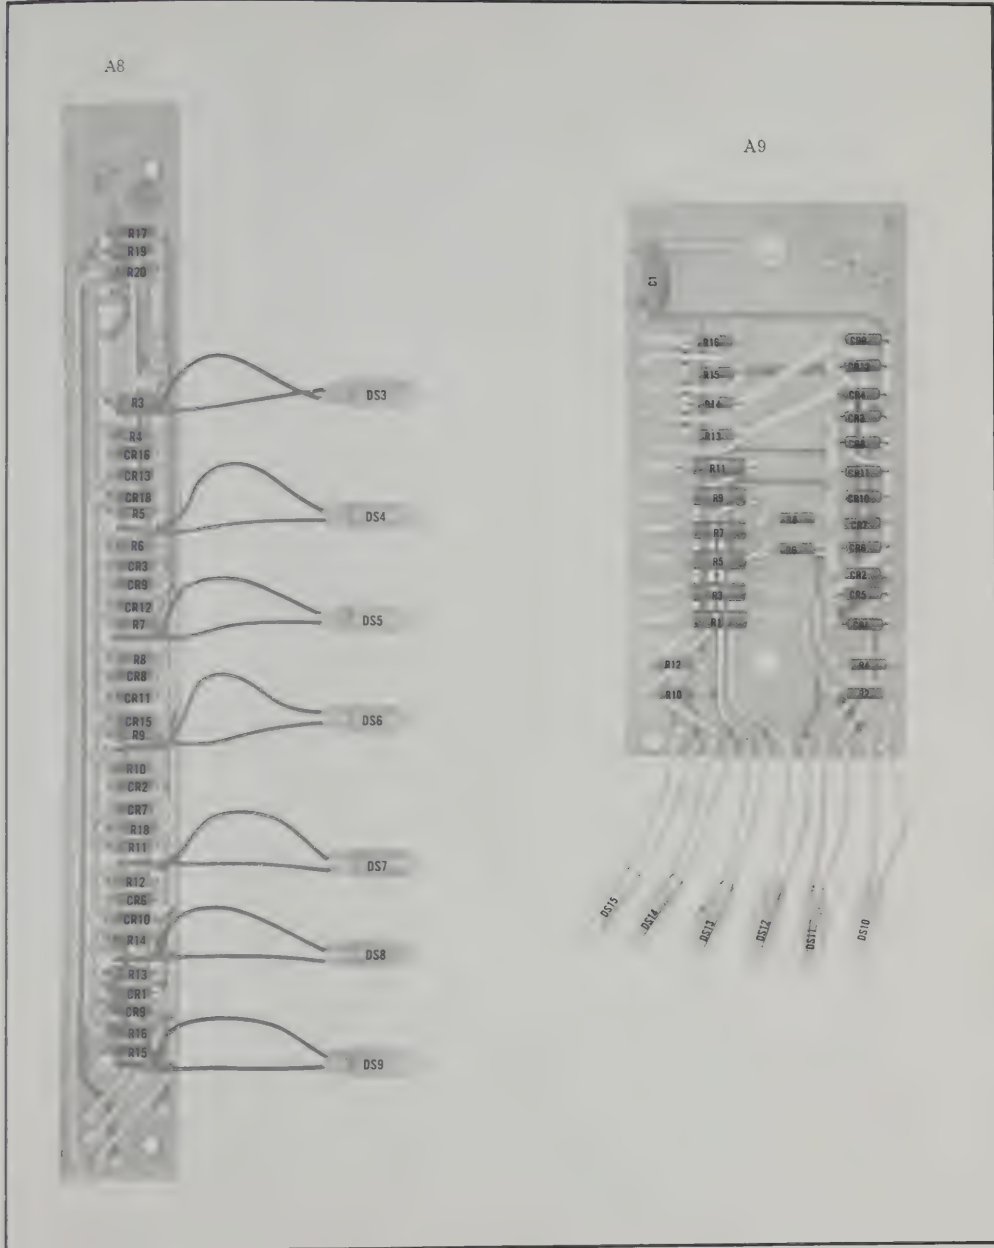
Decimal Point Assembly A8 and Measurement Units Assembly A9 Component Location
